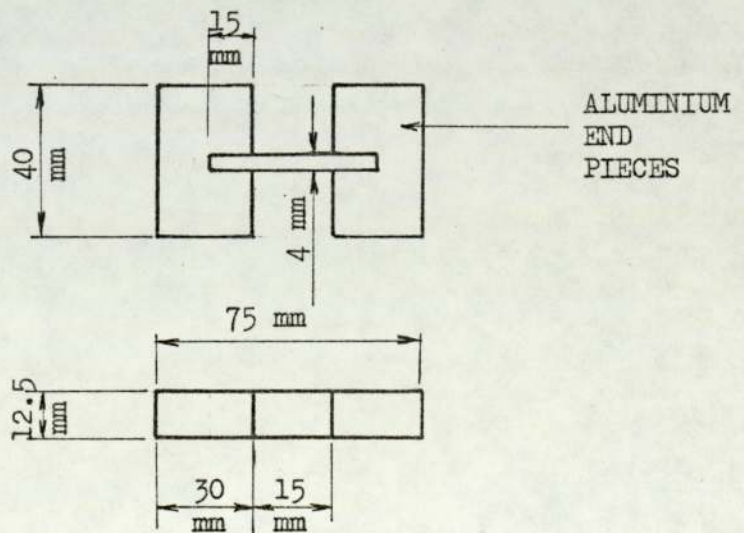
DESIGN OF SHORT TERM TEST SPECIMENS
